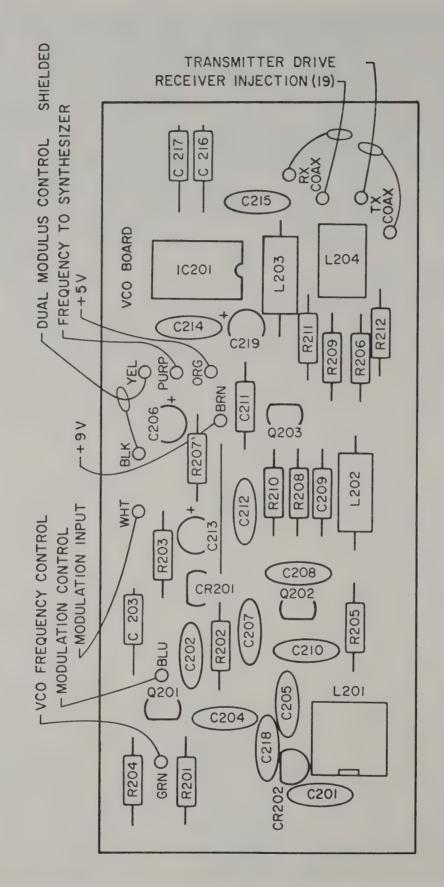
A. Parts Placement, VCO PCB Assembly; Top View.
